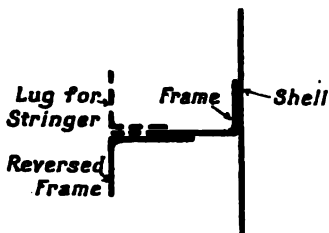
Inadvisable method of fitting the Reversed Frame in Deep Framing.
